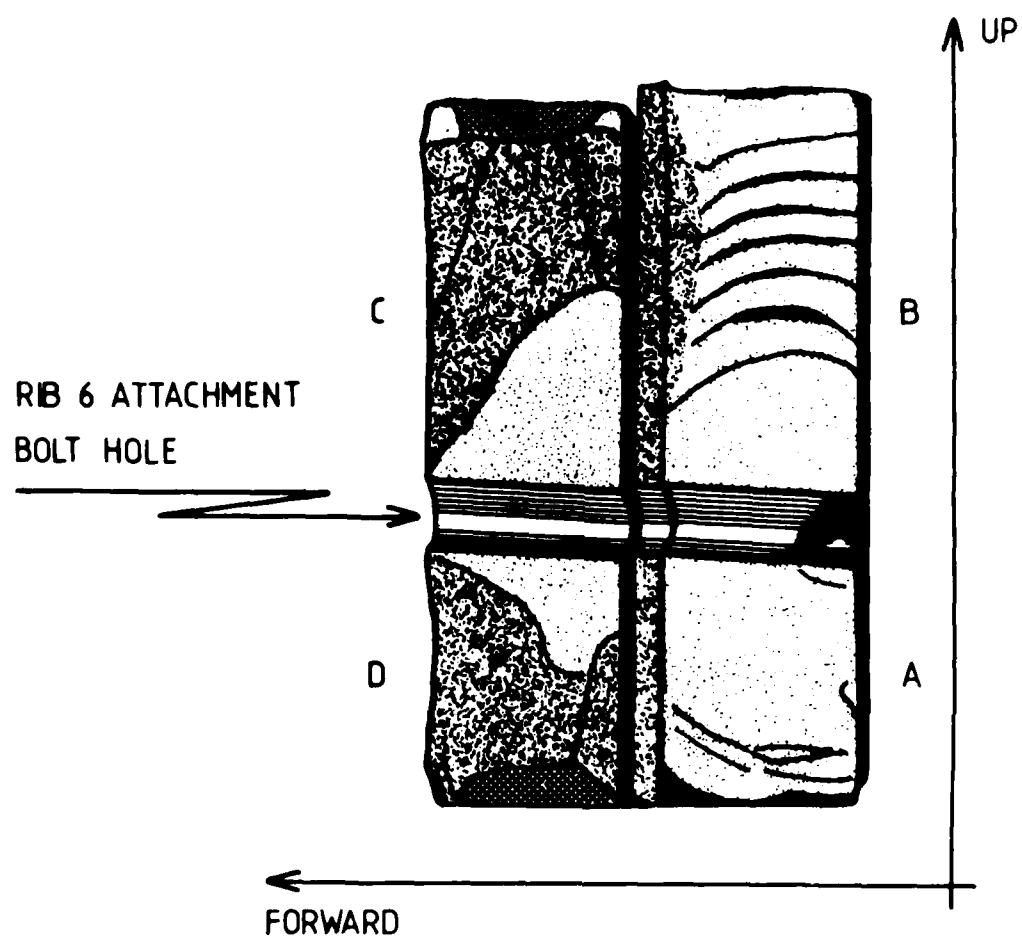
BANDEIRANTE FATIGUE TEST – FRACTURE SURFACES
